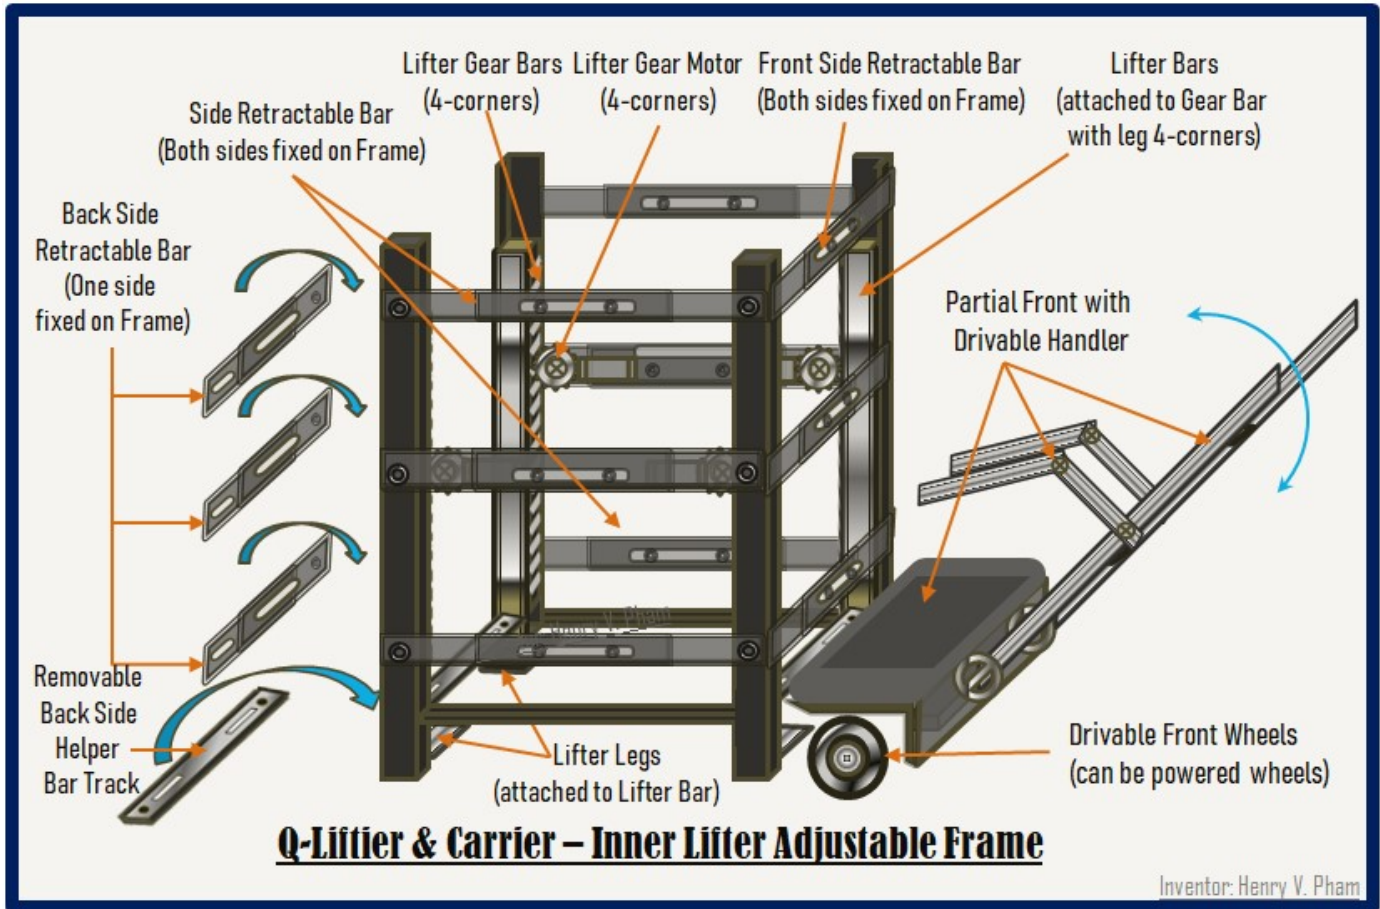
Q-Lifter & Carrier Inner Adjustable Frame
